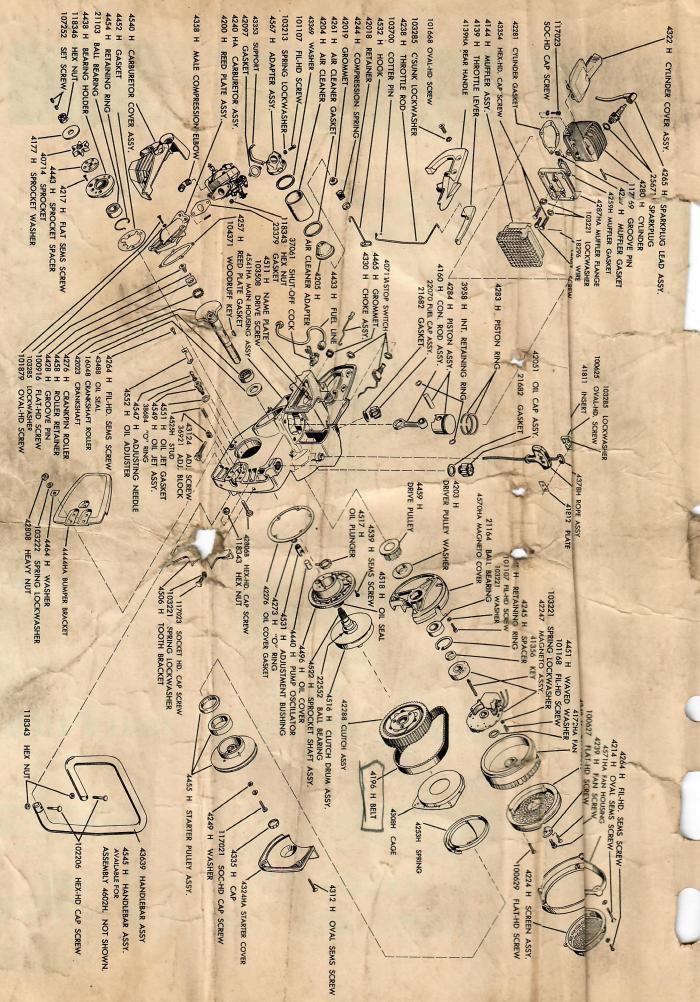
MODEL OMG, 4600H - EXPLODED.
